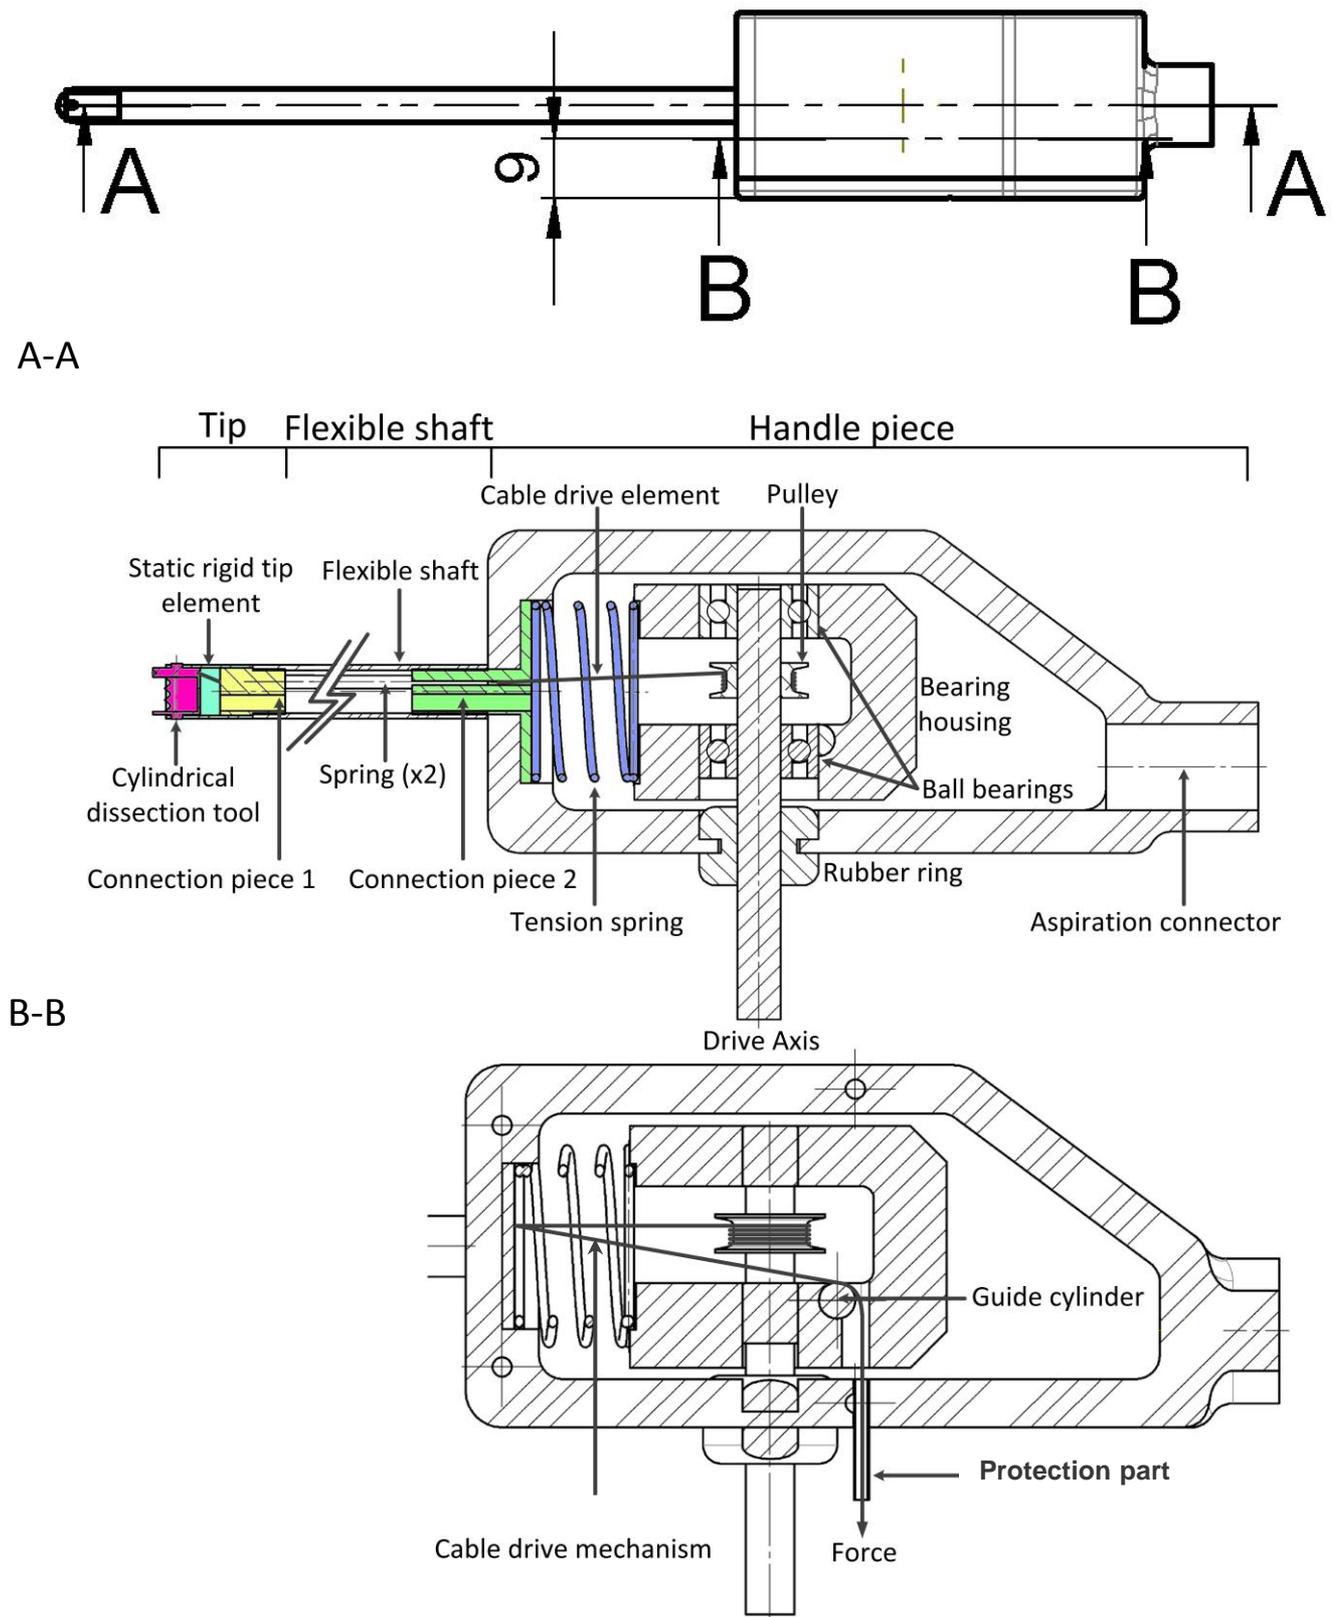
Schematic representation of the final design. Above: Top view of the HORSE morcellator. Middle: Section A-A representing a median cross-section of the HORSE morcellator. Below: Section B-B representing a cross-section 9 mm from the indicated axis to visualize the cable drive mechanism of the HORSE morcellator.
